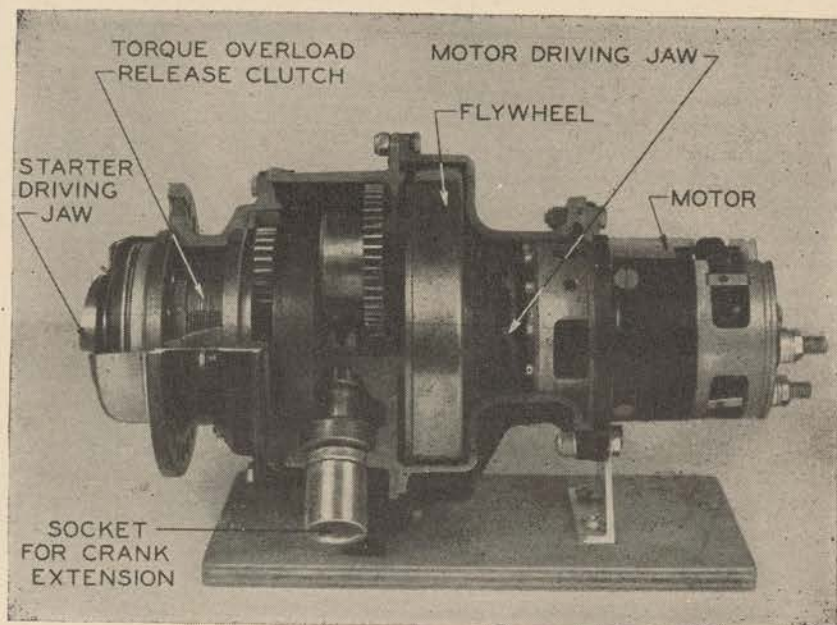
Cutaway view of hand and electric inertia starter type C-21.
